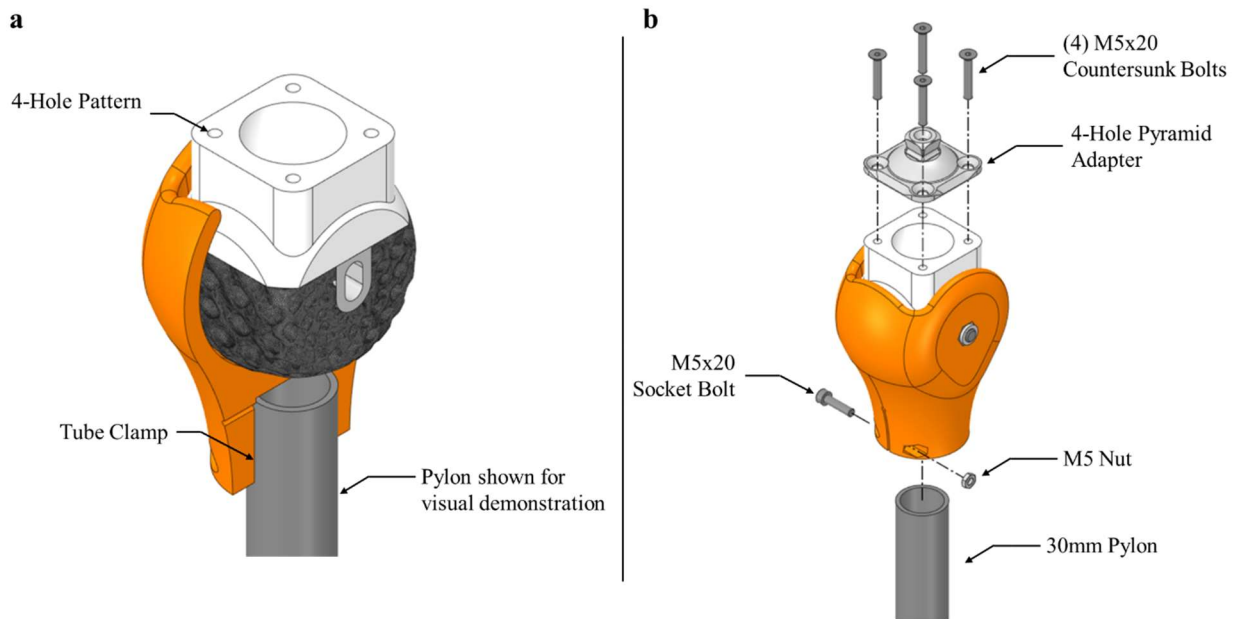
(a) Identification of commercial interfaces. (b) Exploded view of commercial components.
